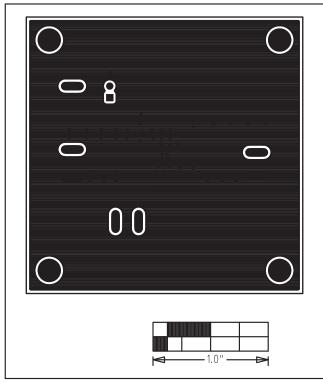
MAX8517 EV Kit PCB Layout—Solder Side
